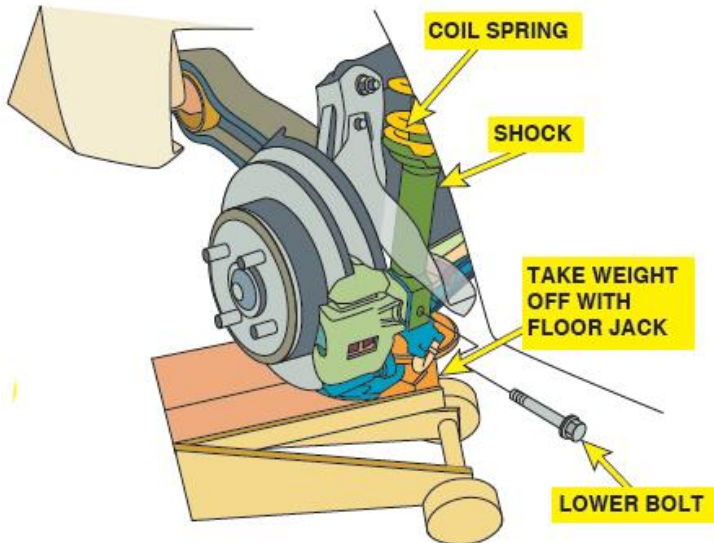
Before removing a rear strut assembly, the rear axle has to be supported.
